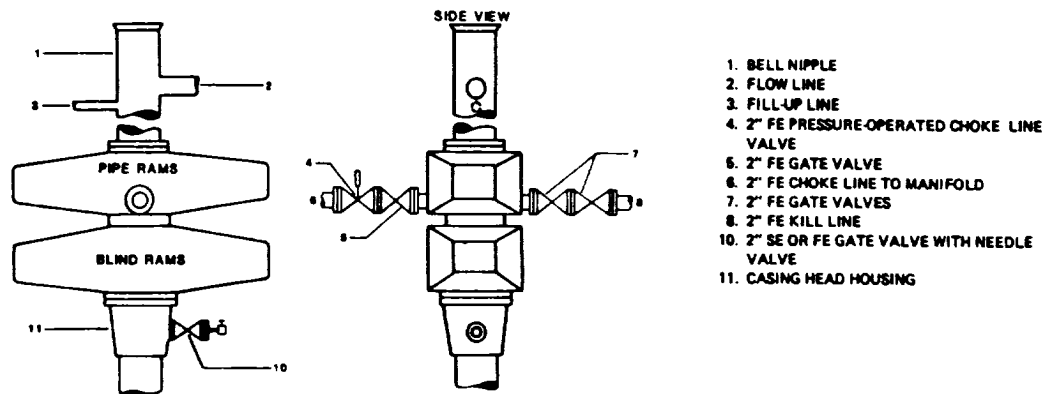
Standard Hydraulic Blowout Preventer Assembly
